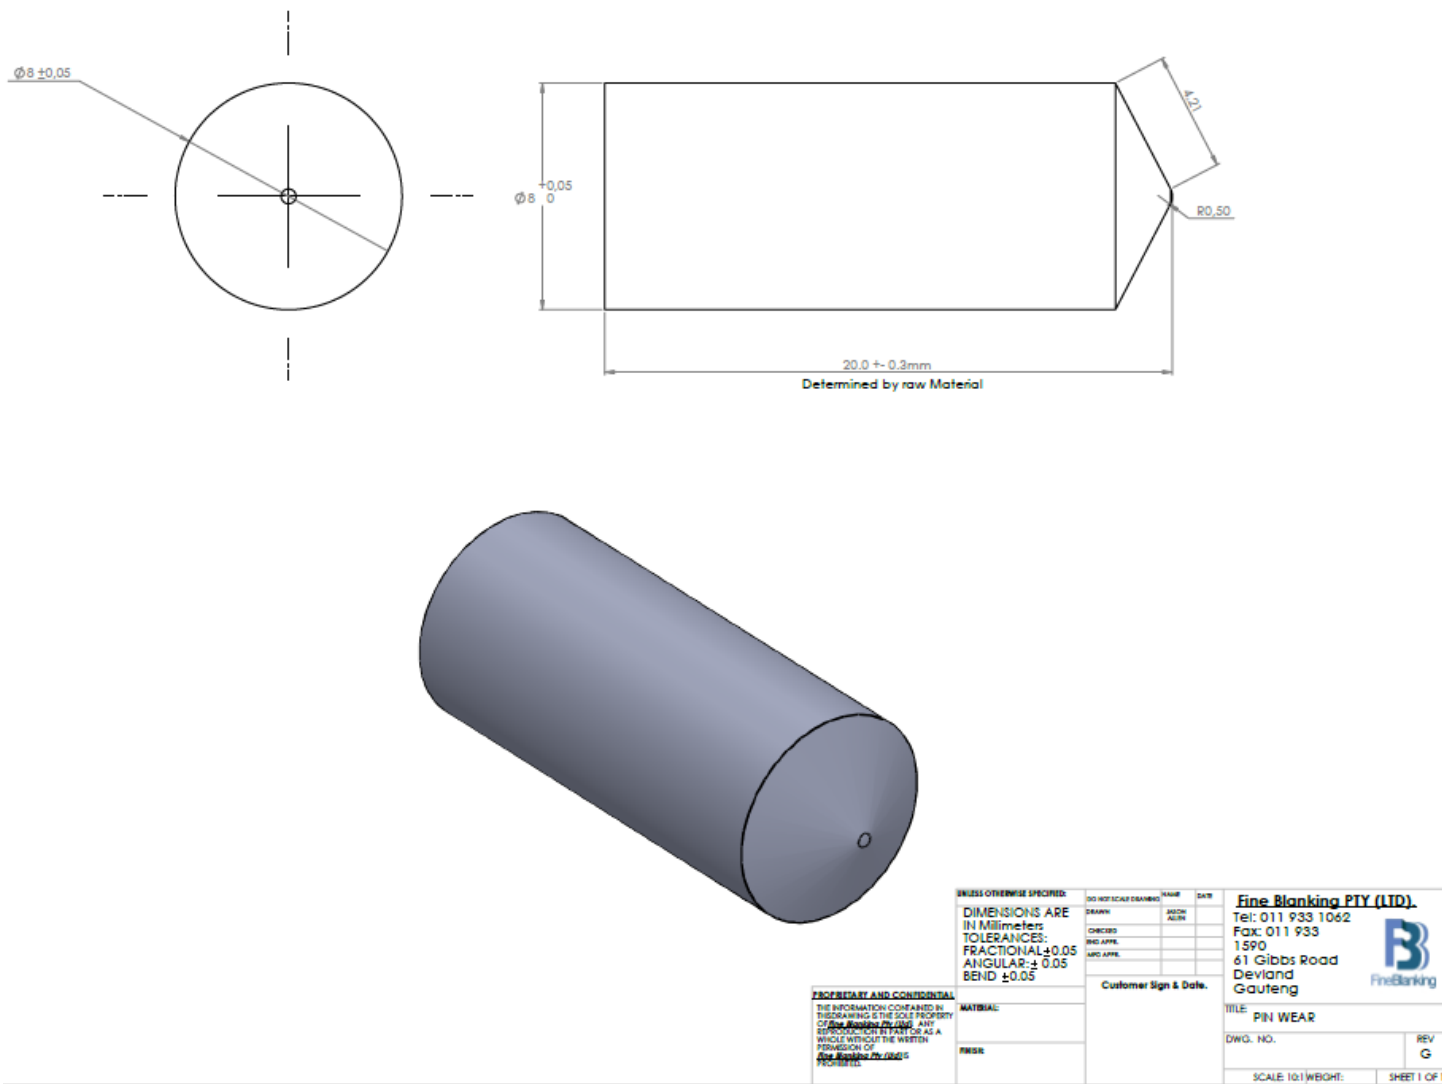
Rounded pin test specimen machined by FineBlanking to be used for sliding wear testing
